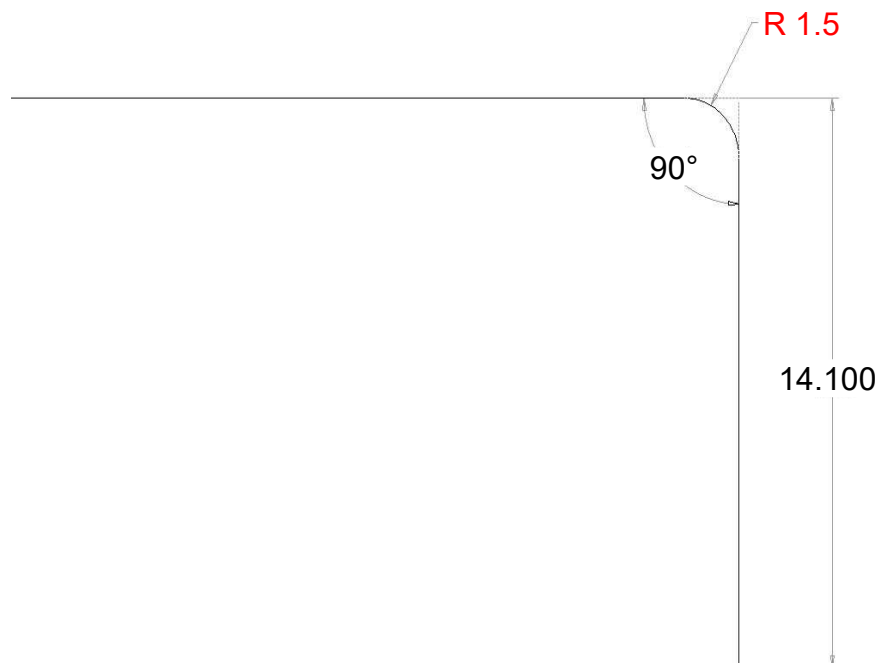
Creo Parametric sketch of the forming punch fillet radius in Sheet-bulk metal forming
